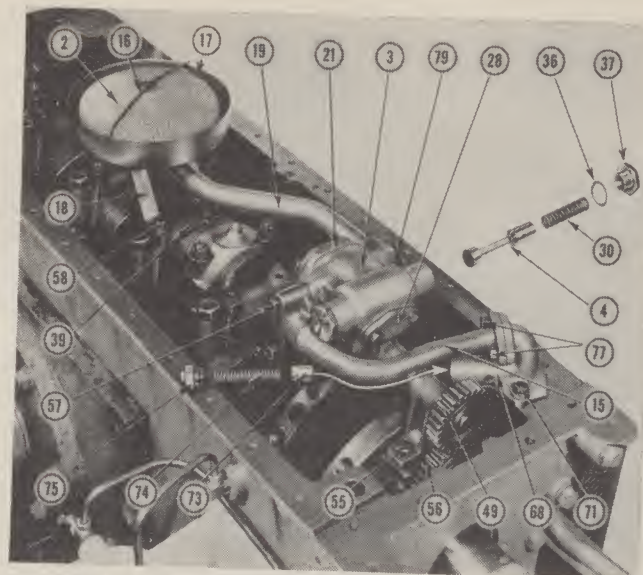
A—A GM engine oil pump installation. Non-adjustable pump relief valve (4) is preset for 100 psi, and non-adjustable oil regulator valve (73) is preset for 45 psi.
